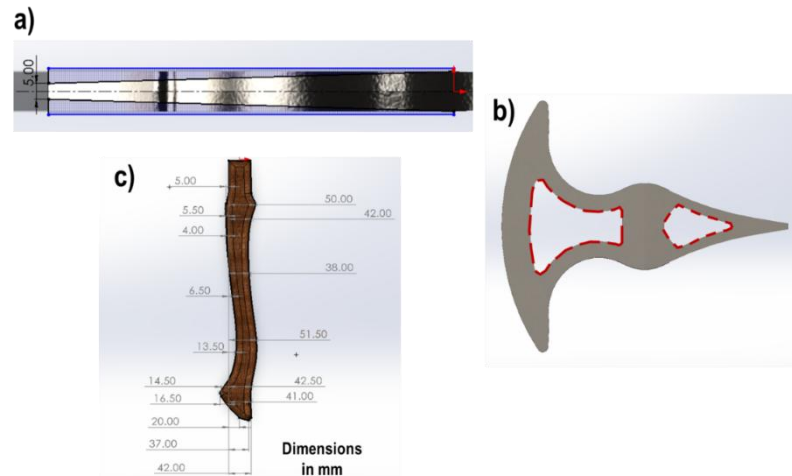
Sequence of machining operations to reduce the weight of the axe blade: a) Cross machining, b) Pocket machining, c) Dimensions of the proposed handle.
